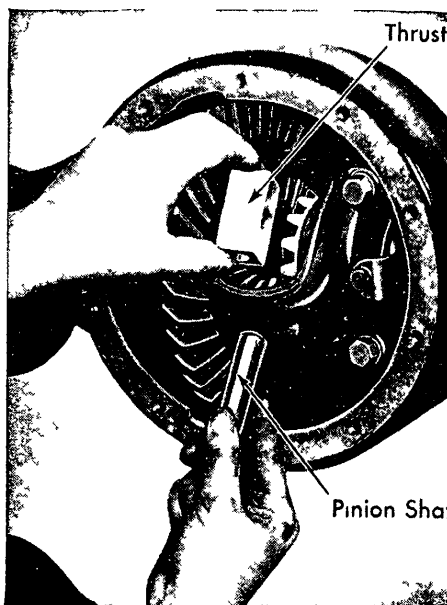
Installing axle shaft thrust block and differential pinion shaft
